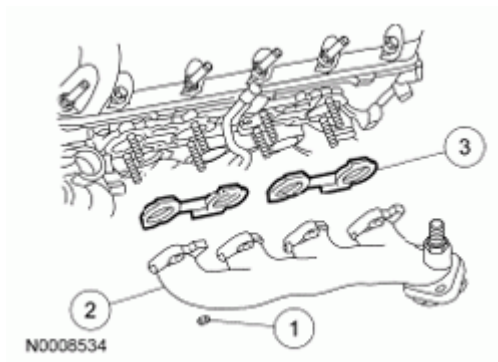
Identifying RH Exhaust Manifold, Nut And Gasket
